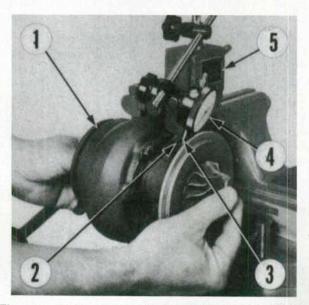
Position dial indicator plunger (3) through oil port (2) to contact turbine wheel shaft to check shaft-tobearing radial clearance. Refer to text for specifications.
